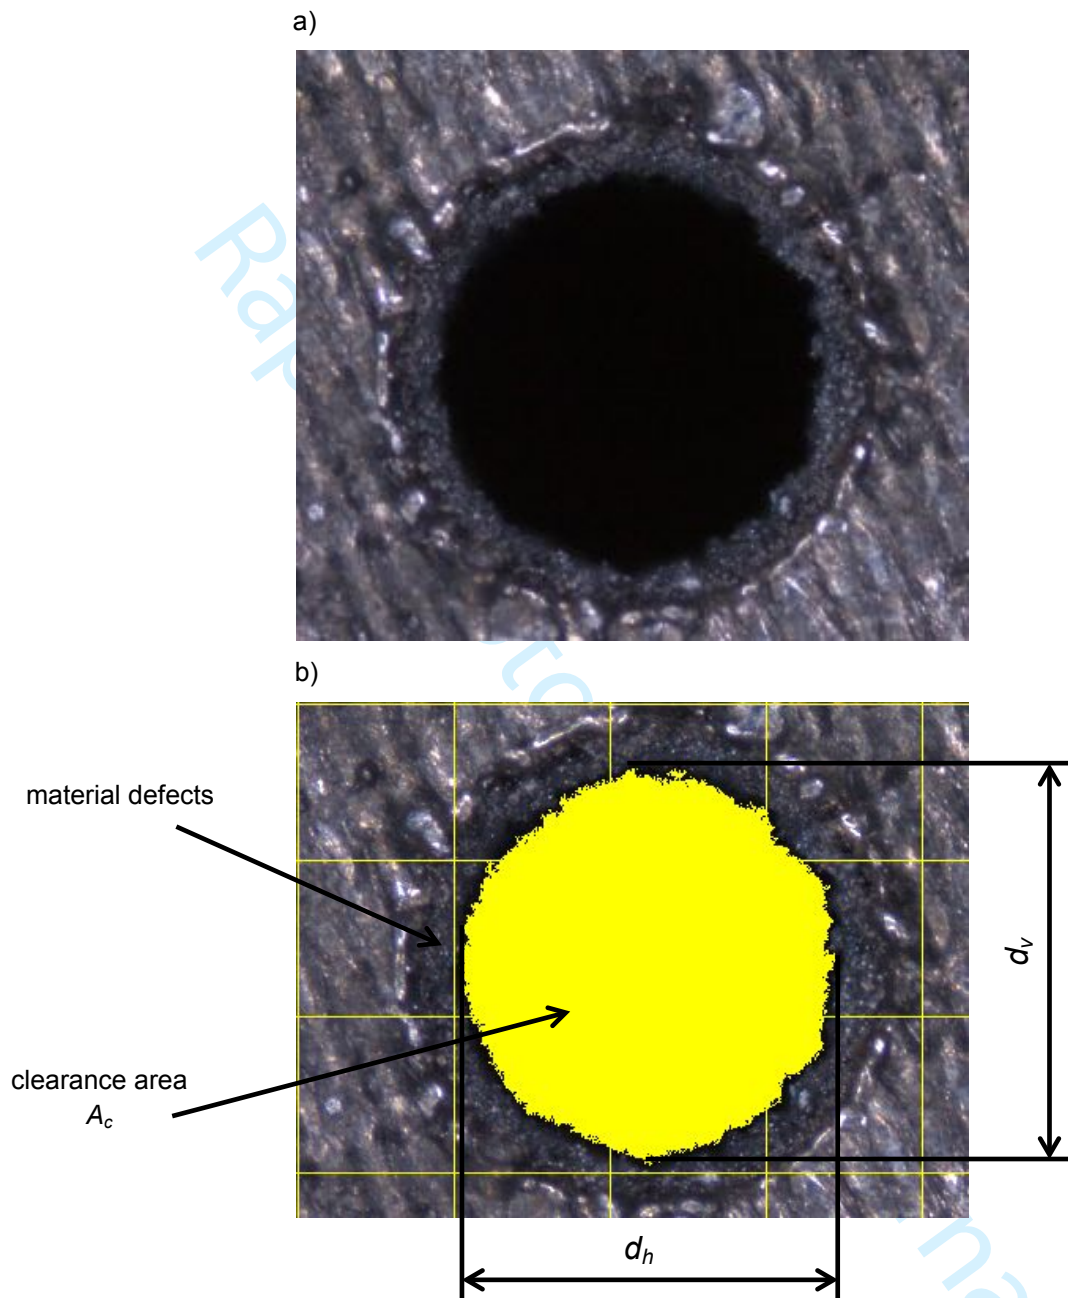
The sample made of aluminium alloy with the hole of an assumed diameter  $d_t = 2$  mm: a) top view of the hole before the measurements, b) top view of the hole after the determination of its clearance and Feret's diameters: horizontal  $d_h$  and vertical  $d_v$
